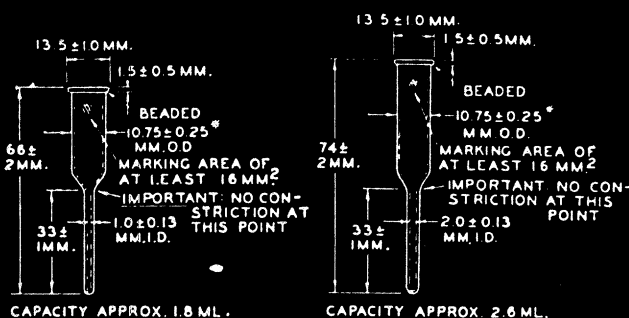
Microcentrifuge tube with cylindrical bottom, plain
